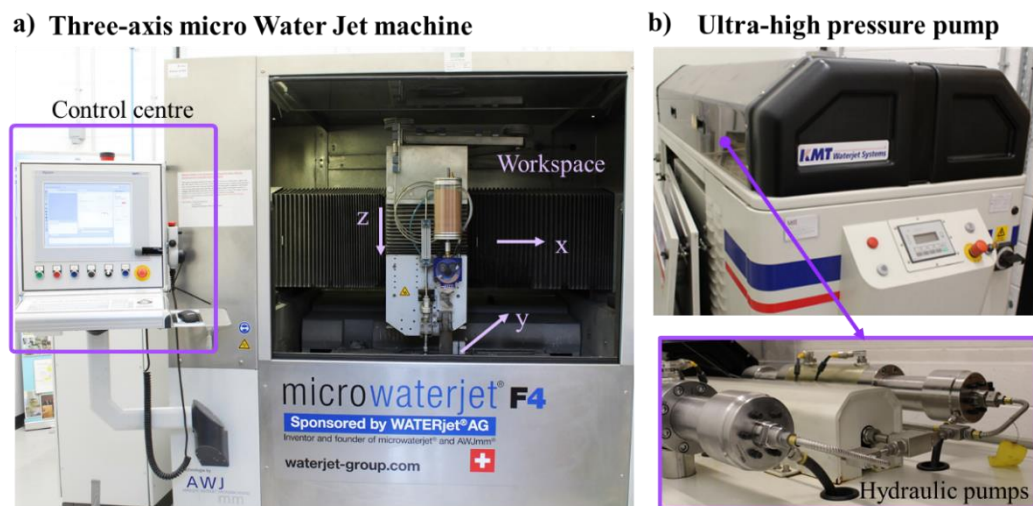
a) Three-axis micro water jet machine from micro waterjet. b) Ultra-high pressure pump KMT Waterjet systems SL-V100D Plus connected to the WJ machine to pressurise the water.
